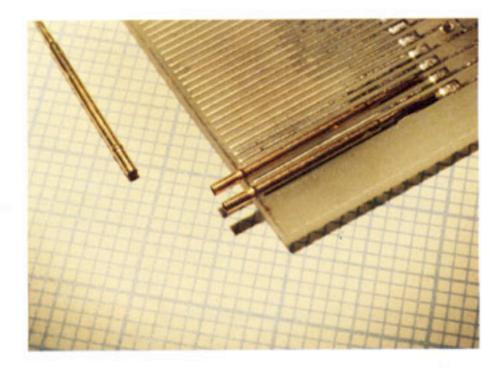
D. Thin copper pins with diameters around 1 mm are soldered to the printed circuit board connector pads. Important for the application is the minimal wetting of the pins with solder. Capillary forces of the molten solder align the pins parallel to the solder pads.
